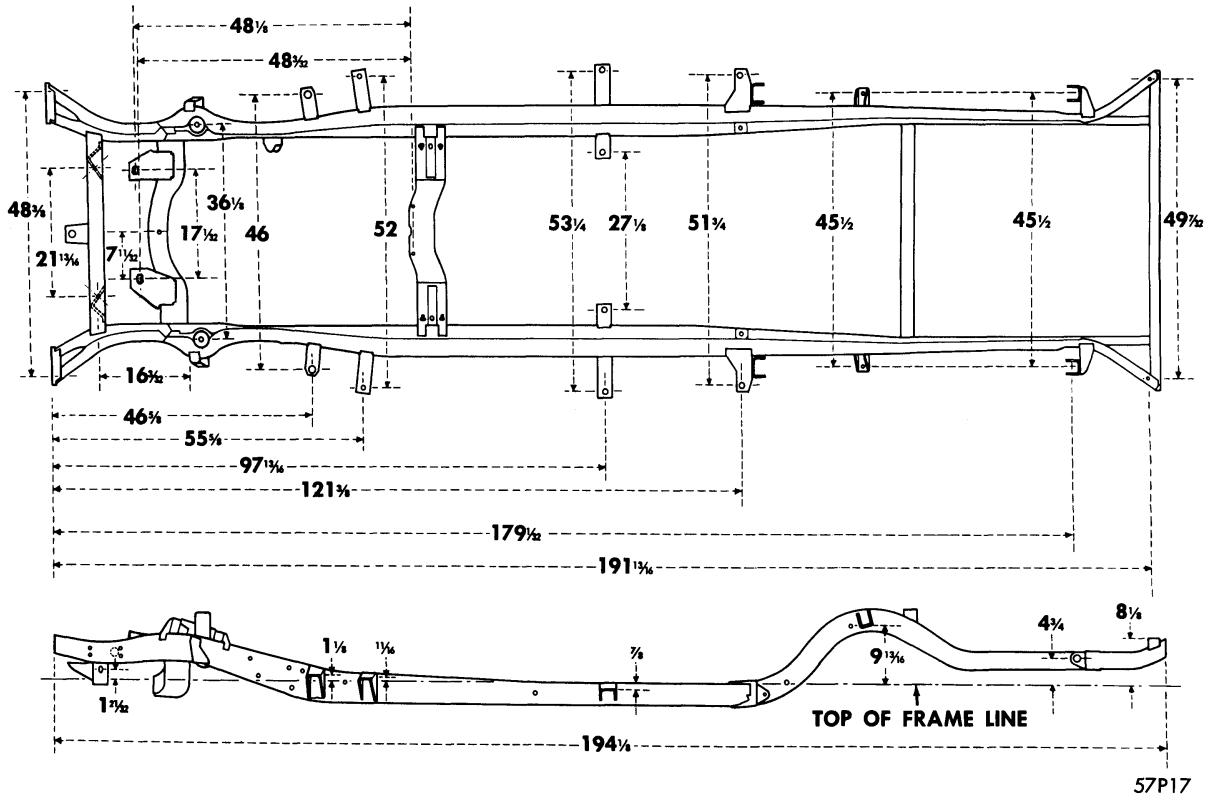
Frame Dimensions—All Models—P-30, LP-1
